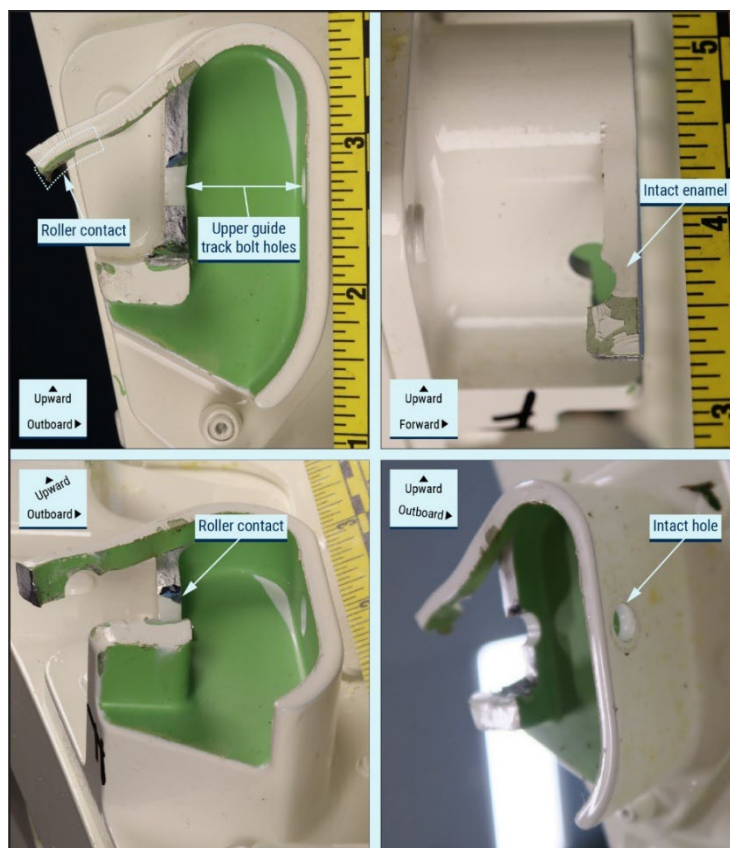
Multiple views of the forward upper guide fitting on the left MED plug.
